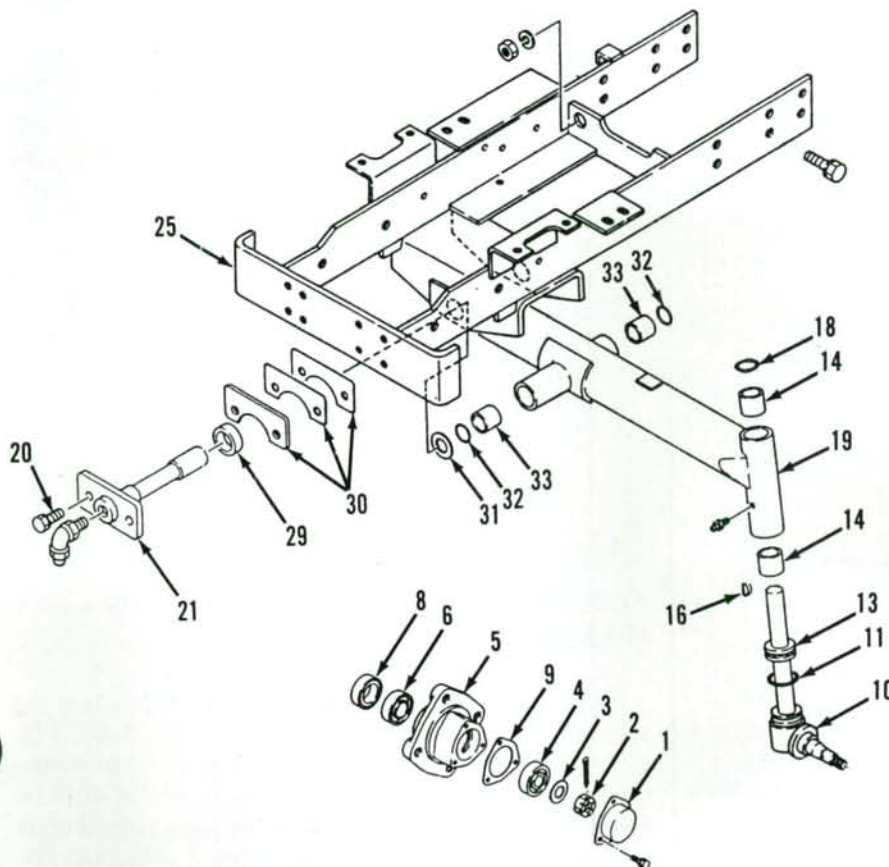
Exploded view of front axle typical of some 245 and 255 models. Refer to Fig. 3 for models with adjustable tread axle. Upper steering arms, drag link and related parts for non-adjustable axle are similar to those shown in Fig. 3.
